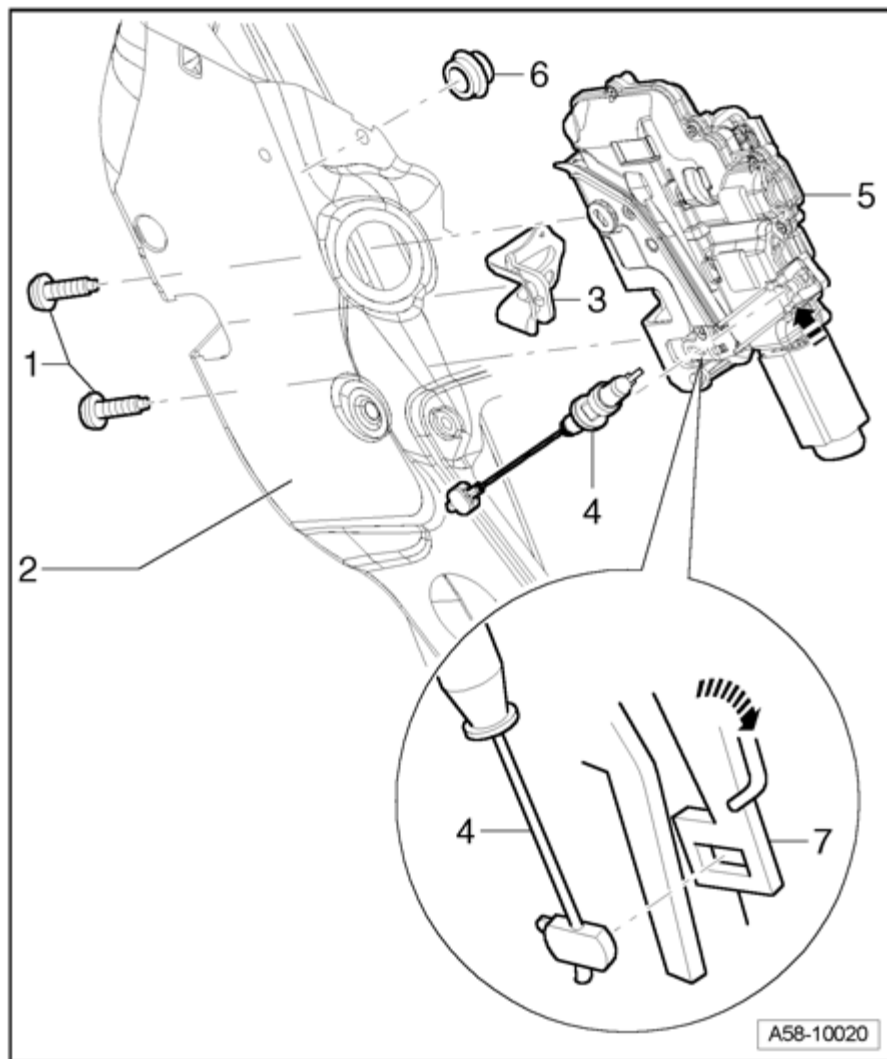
Identifying Locking Mechanism On Door Handle Engaged In Trim
